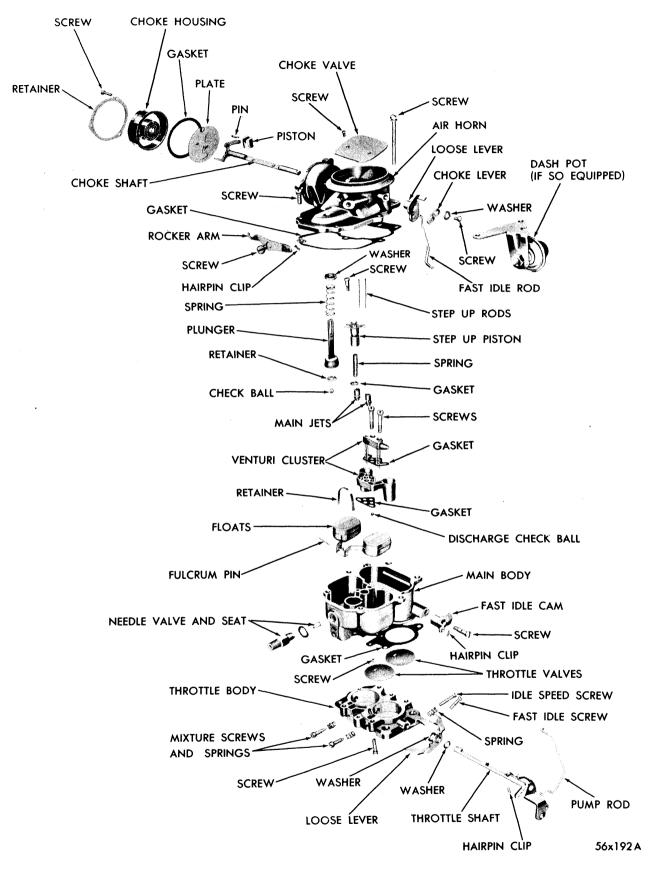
Carburetor Assembly (Disassembled View) (BBD-2312 & 2313 S)
